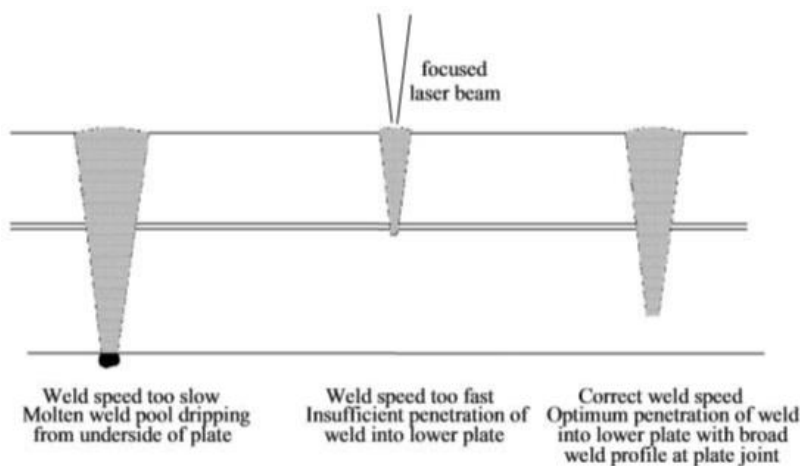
Laser stake welds showing the effects of weld speed (Bright & Smith, 2004)
